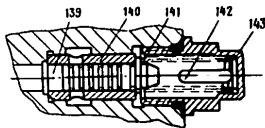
HP-11A Unit, Fuel By-Pass Valve
